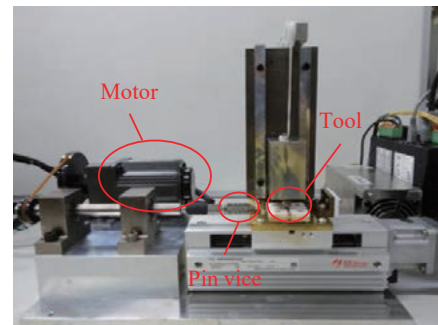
Magnetic fluid grinding machine for producing a micro-sized tension test specimen.
